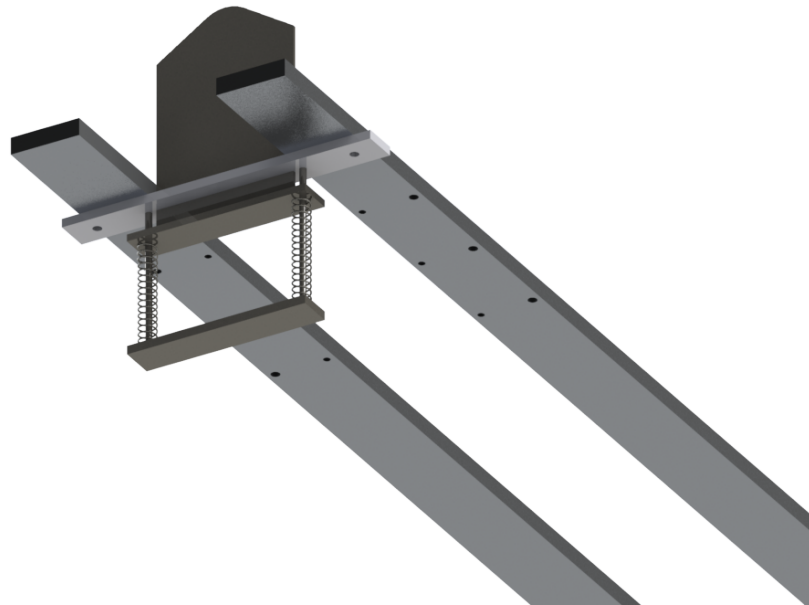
Proposed Alignment Mechanism – Bottom View
